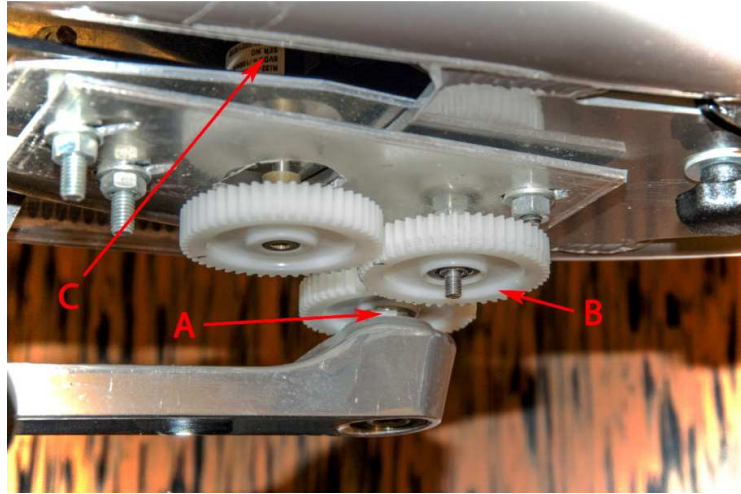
Position of the BBS (A), the installed gears (B) and the encoder (C)
